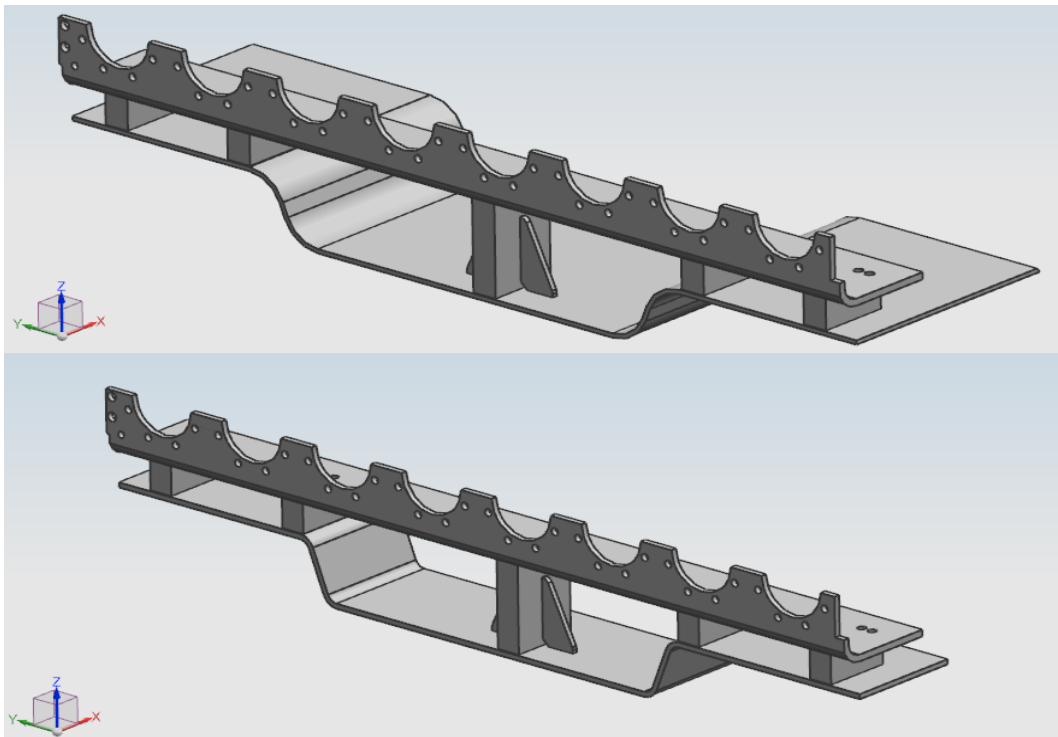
Mounting Plate with support blocks and free end Chute. (Upper: new & lower: old.)
